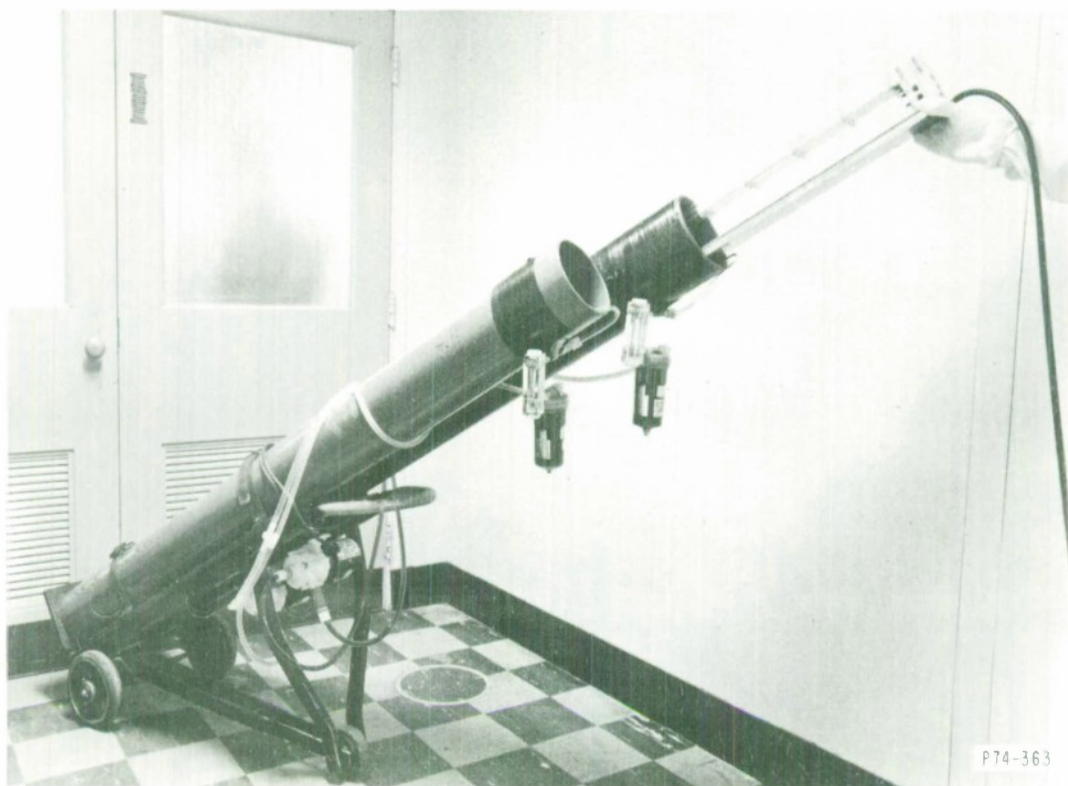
Vacuum chuck and anode assembly being inserted into the tank for electroplating of permalloy. The tank is wound with a coil to produce an orienting field. The second tank holds a copper deoxidant.
